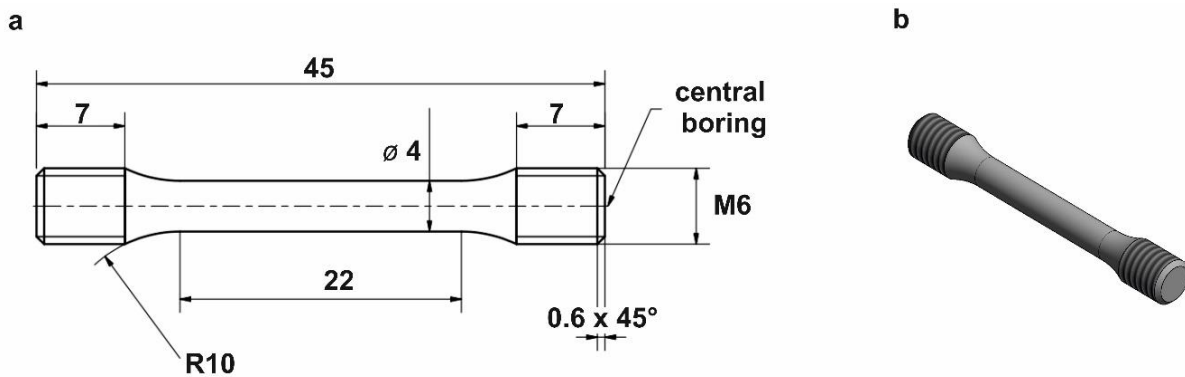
(a) Schematic representation of tensile specimen with dimensions specified in mm.
